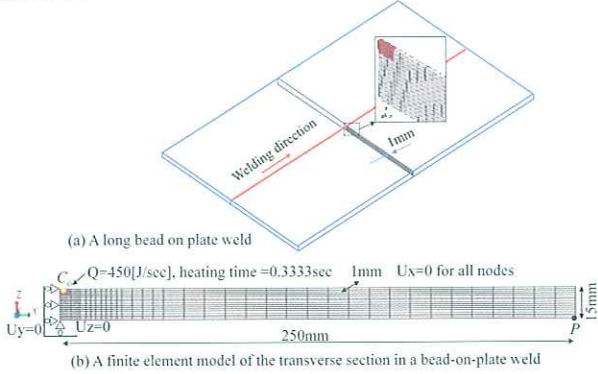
A basic model of a long bead-on-plate weld.
